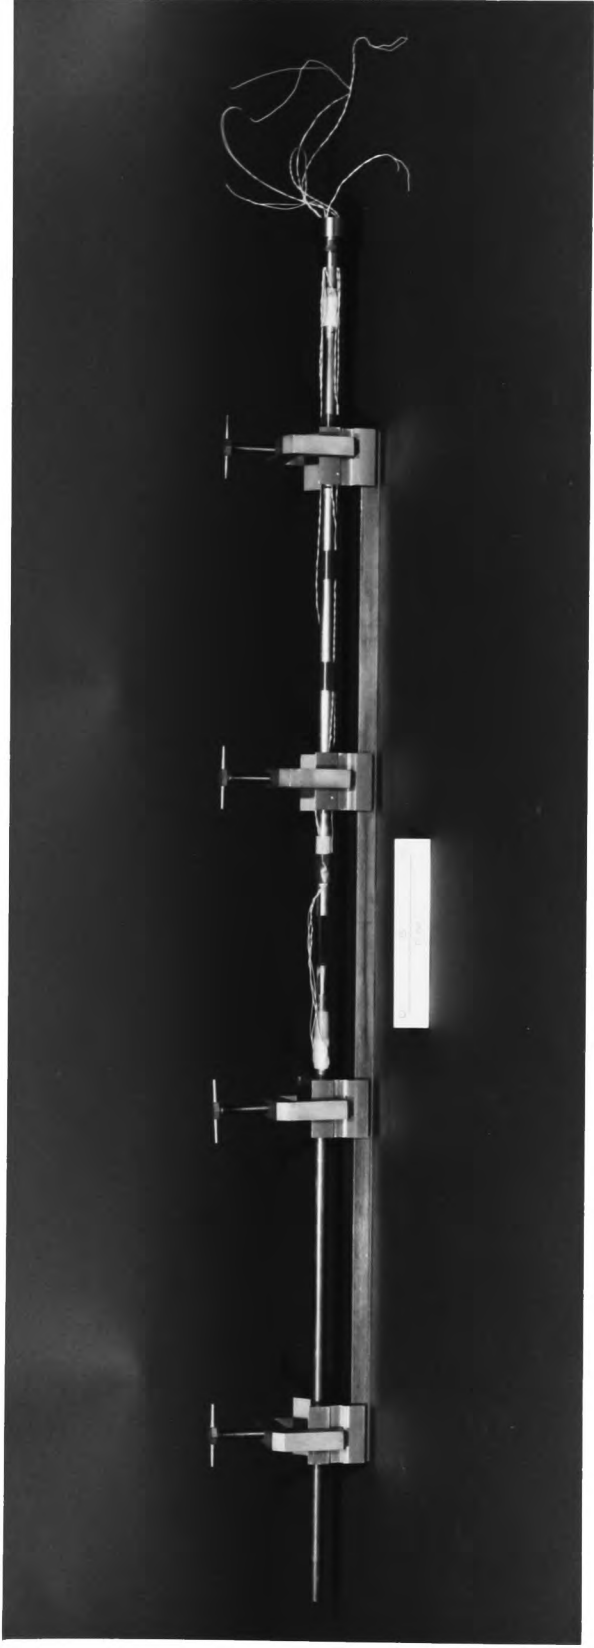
Jig for fixing specimen into the slots in the loading bars
